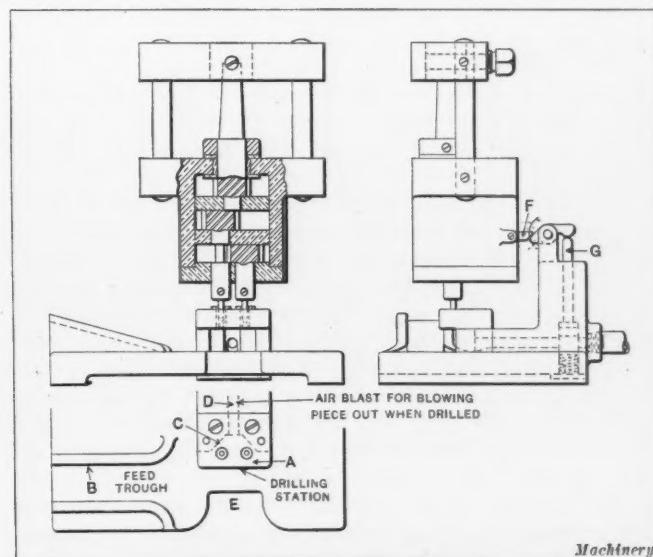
Work-holding Fixture provided with automatically operated Air Ejector to discharge Work through Chute into Receiver placed under Drilling Machine
